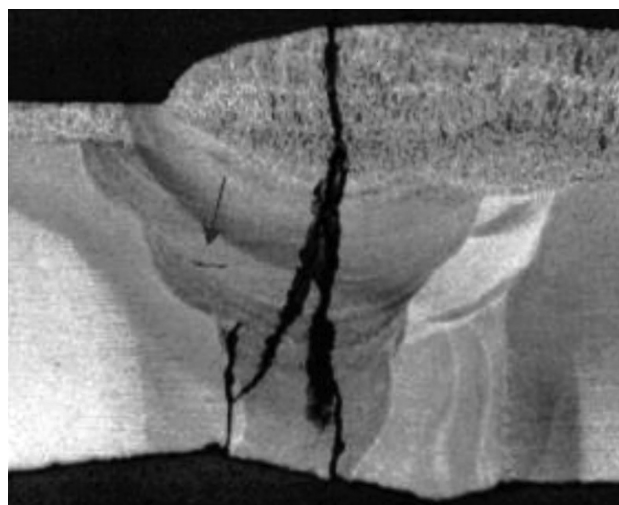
Weld macrosection with the crack (5× zoom)³
